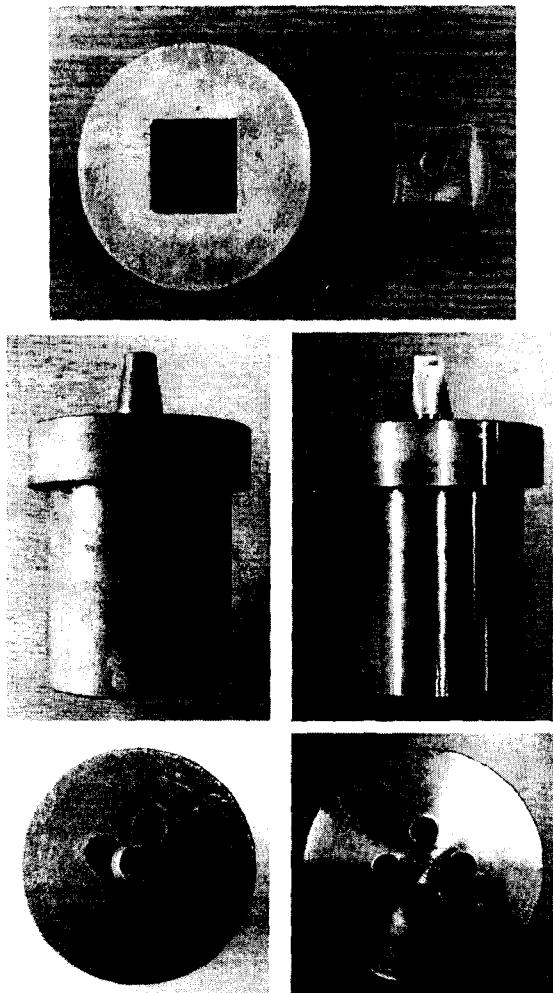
The photo of multihole container with conical plug and rectangular conical plug and electrode of electric discharge machining
